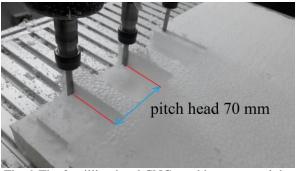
The 3-milling head CNC machine engraved the EPS foam to the example model.
